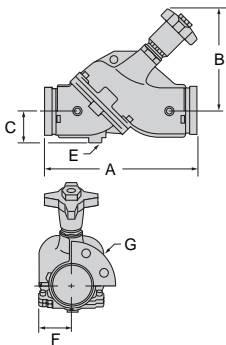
FIGURE GBV-G - GROOVED-END STRAIGHT BALANCING VALVES
